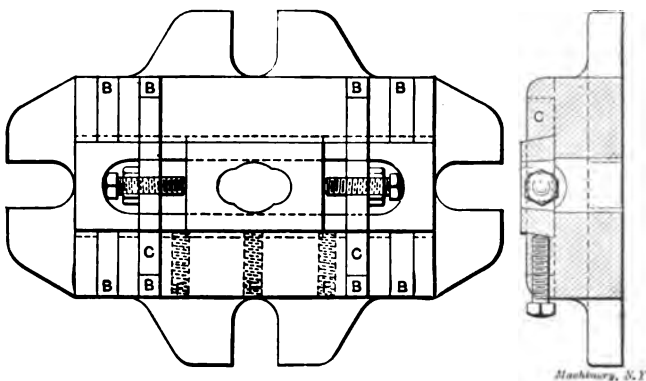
Die-bed of the Dovetailed and Side Set-screw Type, also secured by End-thrust Set-screws
